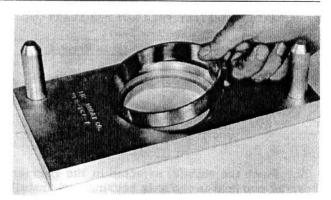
Placing Bearing Cup in Special Tool MFN 267-Y
